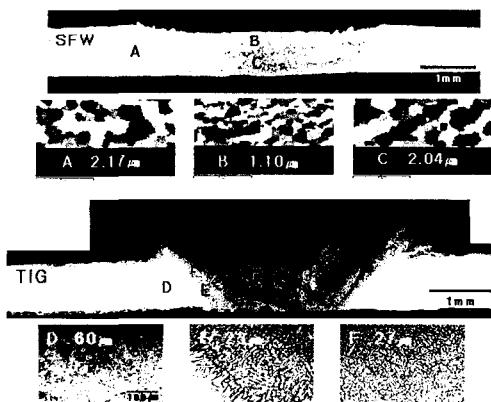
Grain sizes of the SFWed and TIG welded 1050 Al alloy sheets (1.0mmmt) fabricated by ARB process.
